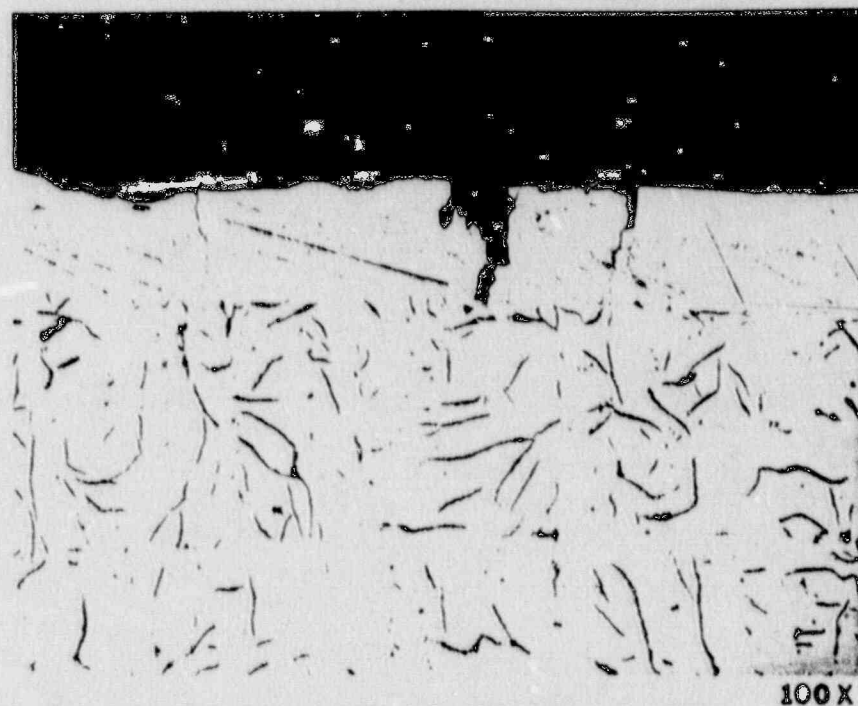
Longitudinal view of the B diesel 7L liner on the thrust side 11 1/2 inches from the bottom showing metallic deposits, filled pores and cracking in the Cr plating(piece labeled 'B').
